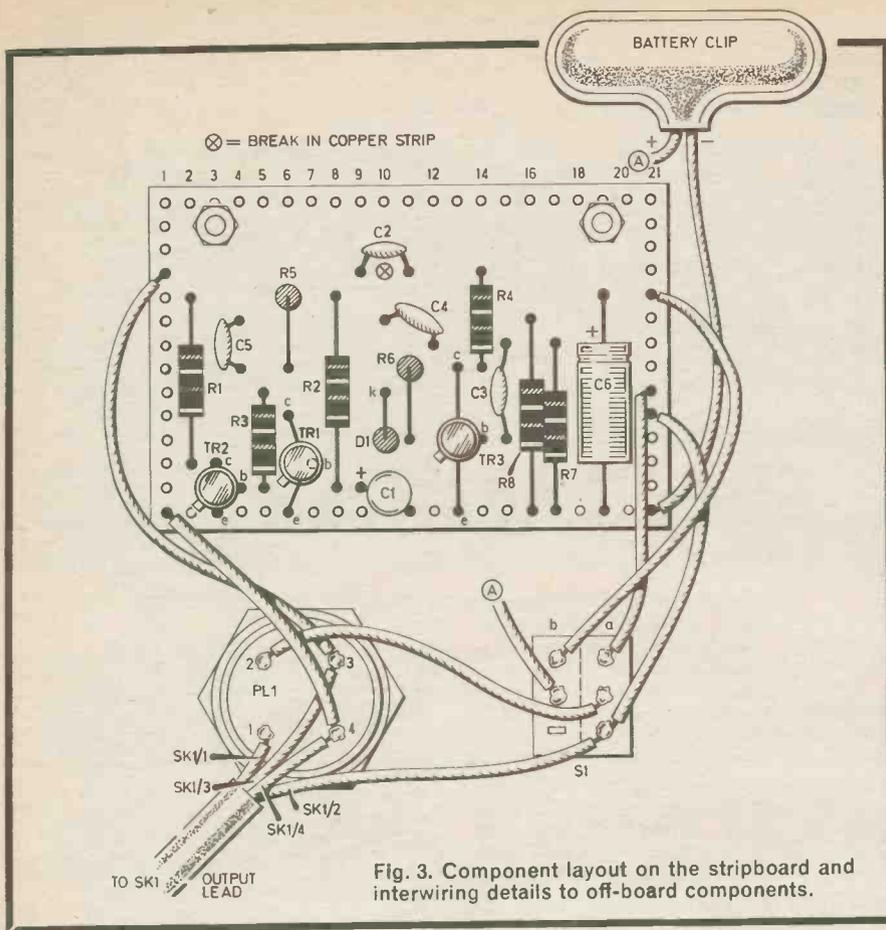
Component layout on the stripboard and interwiring details to off-board components.
